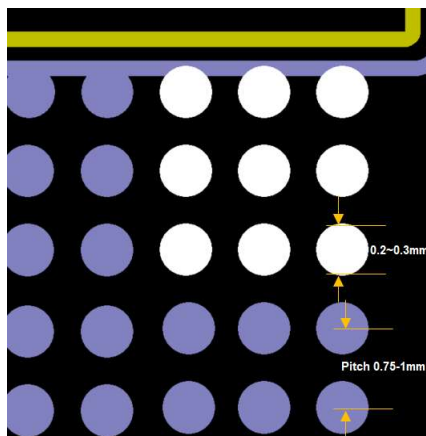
PCB Exposed Pad Land Pattern Via Grid
